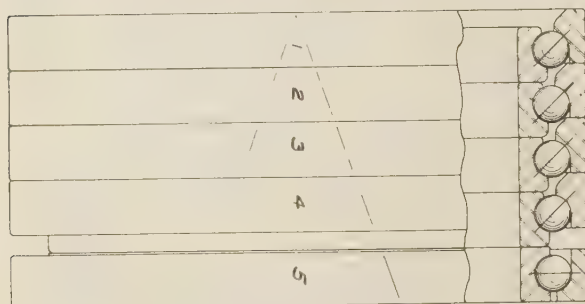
OFFSET STACKED BEARINGS WITH PRELOAD BEARING
